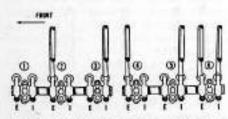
With No. 1 piston on "TDC" exhaust stroke on six sylinder engines, adjust exhaust raive gap on No. 2 cylinder, intake vaive on No. 3 cylinder, exhaust raive on No. 4 cylinder, intake raive on No. 5 cylinder and intake and exhaust on No. 6 cylinder. Refer to Fig. 59.
